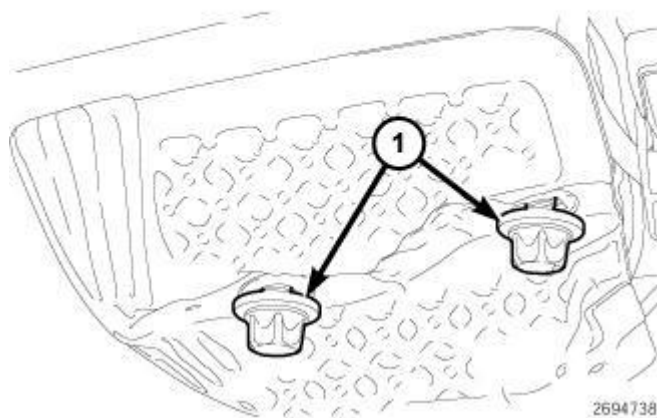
Right Engine Mount Heat Shield Retaining Bolts
